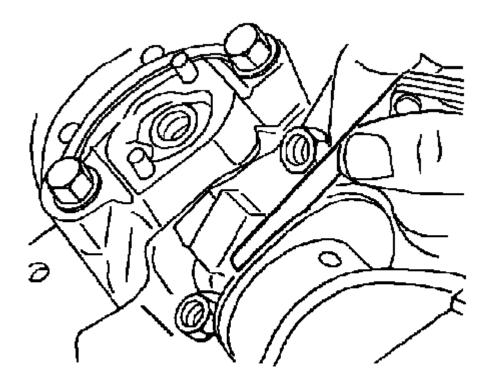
Measuring Connecting Side Clearance Courtesy of GENERAL MOTORS CORP.
